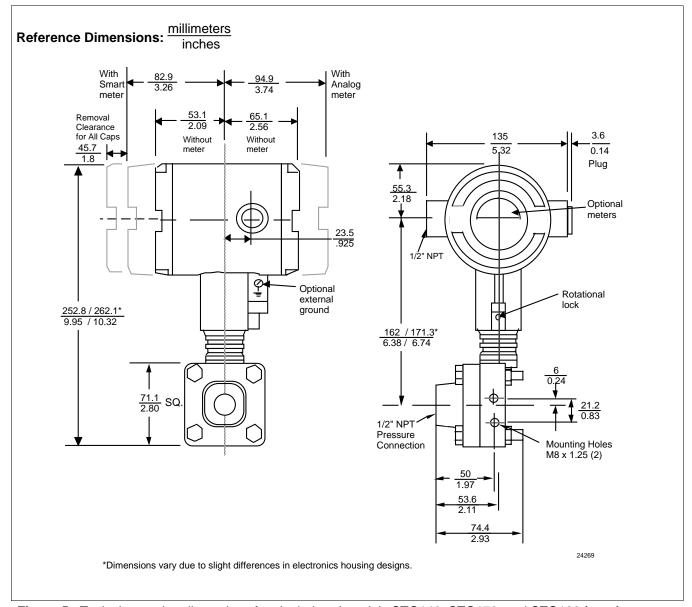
Typical mounting dimensions for single-head models STG140, STG170, and STG180 for reference.
